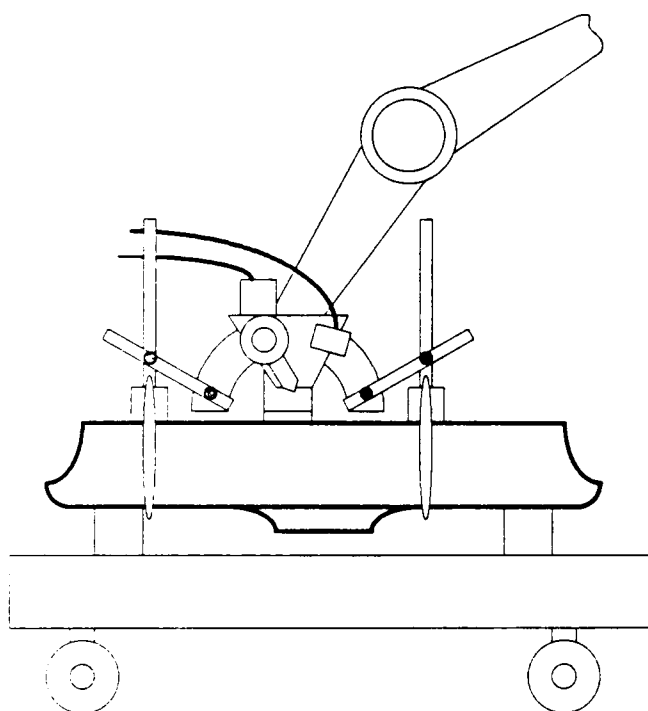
Schematic drawing of horizontal wheel carrier with the x-ray diffractometer mounted.
